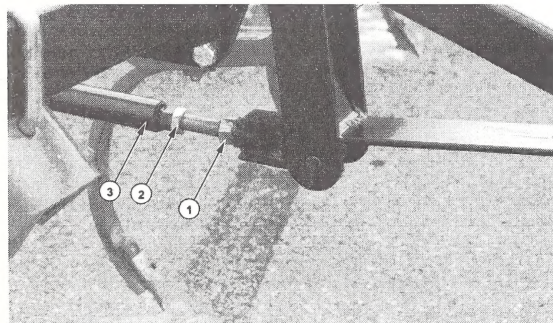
Depth Link Adjustor Assembly. (1) Adjusting Nut, (2) Jam Nut and (3) Depth Link Adjustor Rod.
